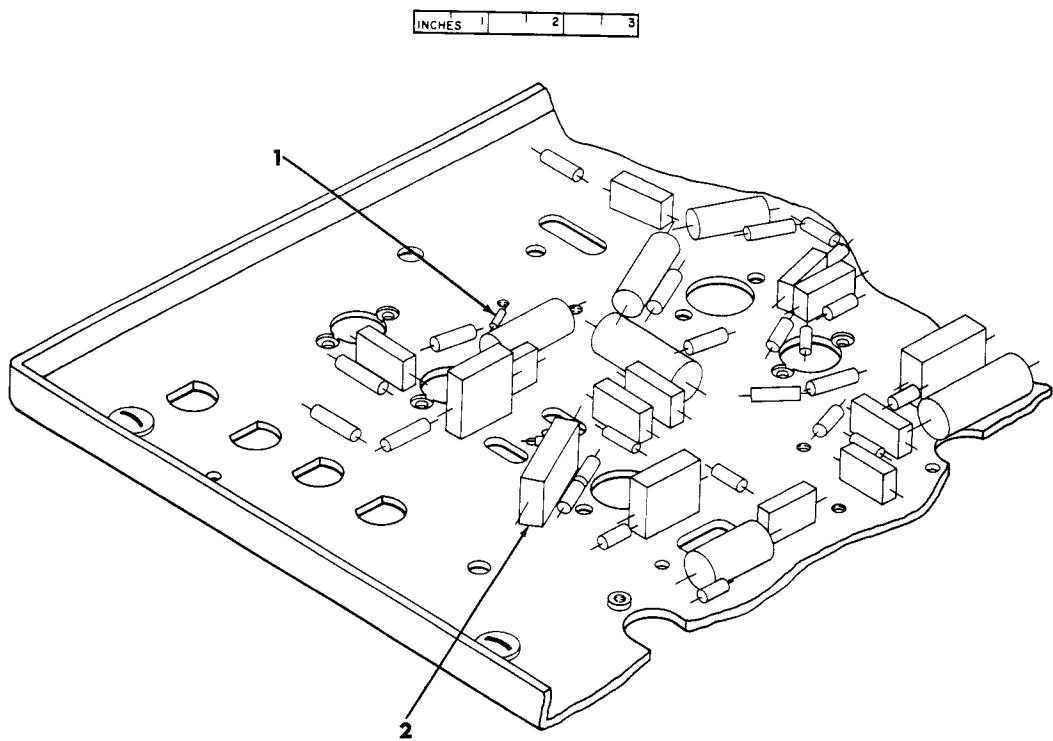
Coder, radar, guided missile (8159349)—partial exploded view
